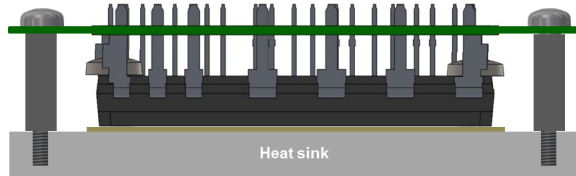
Robust Assembly Method of ASPM 27 Package to Reduce Stresses from PCB Bending
